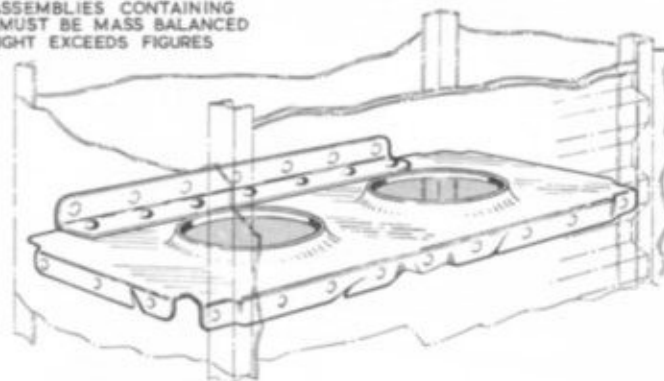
Method of repairing cracked flanges in lightening holes
